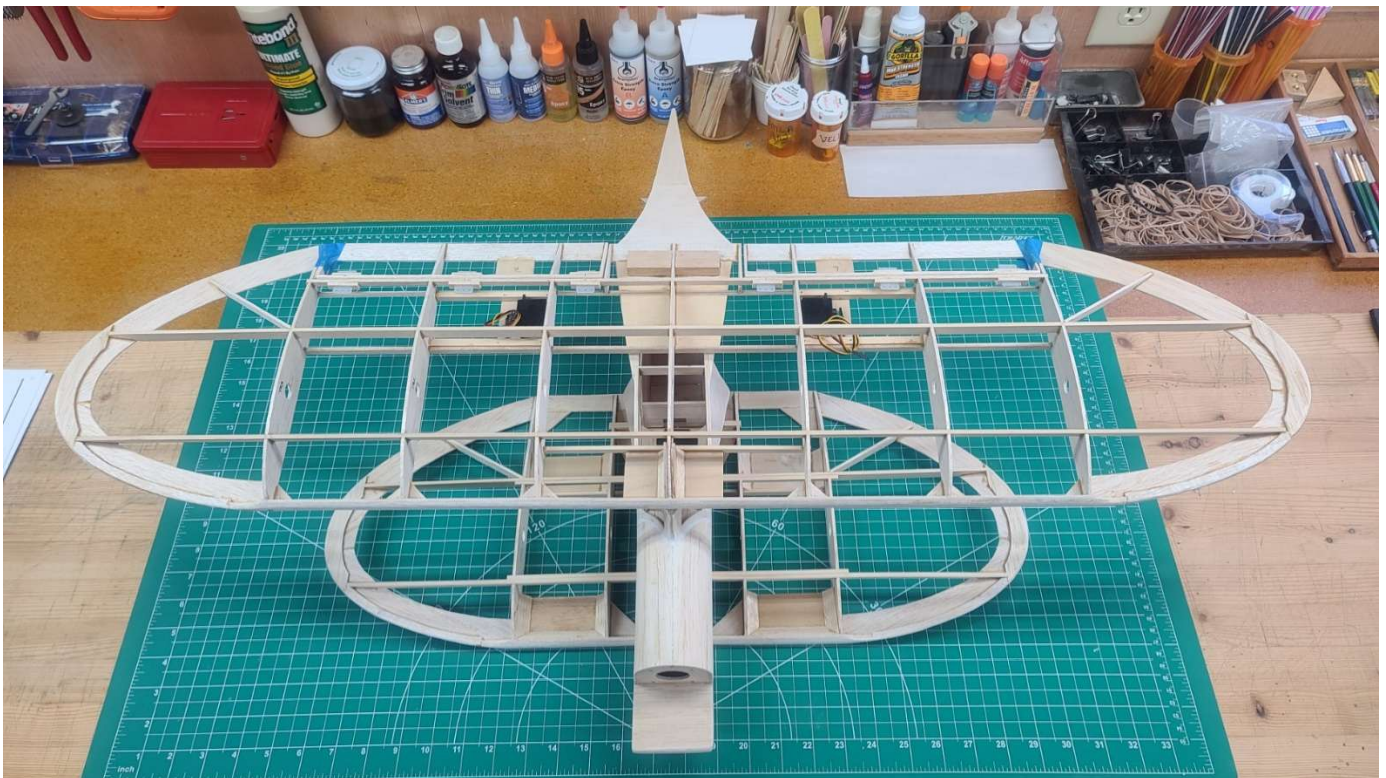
Top Wing Forward Mounting Plates to Fuselage Part #2-4 Fitting
